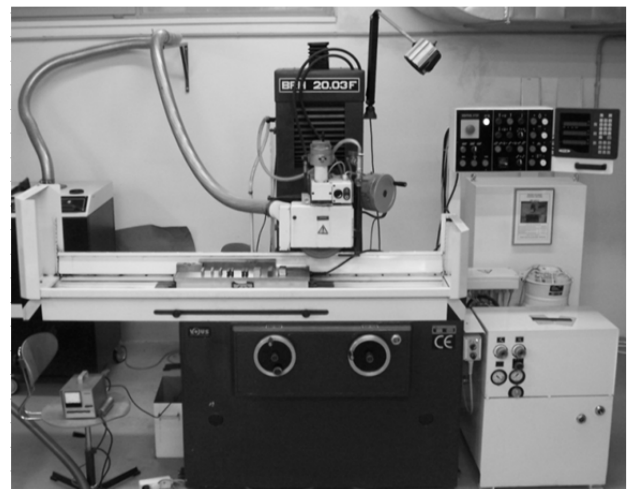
Grinding machine BRH 20.03 F (FT UTB Zlín Department machining).
